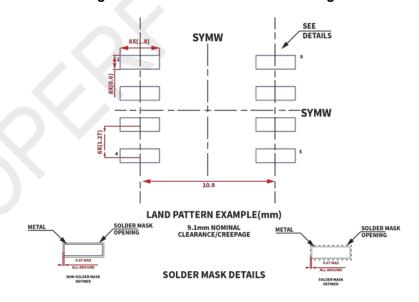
CMT812XWX SOW8L Package Board Layout Example
